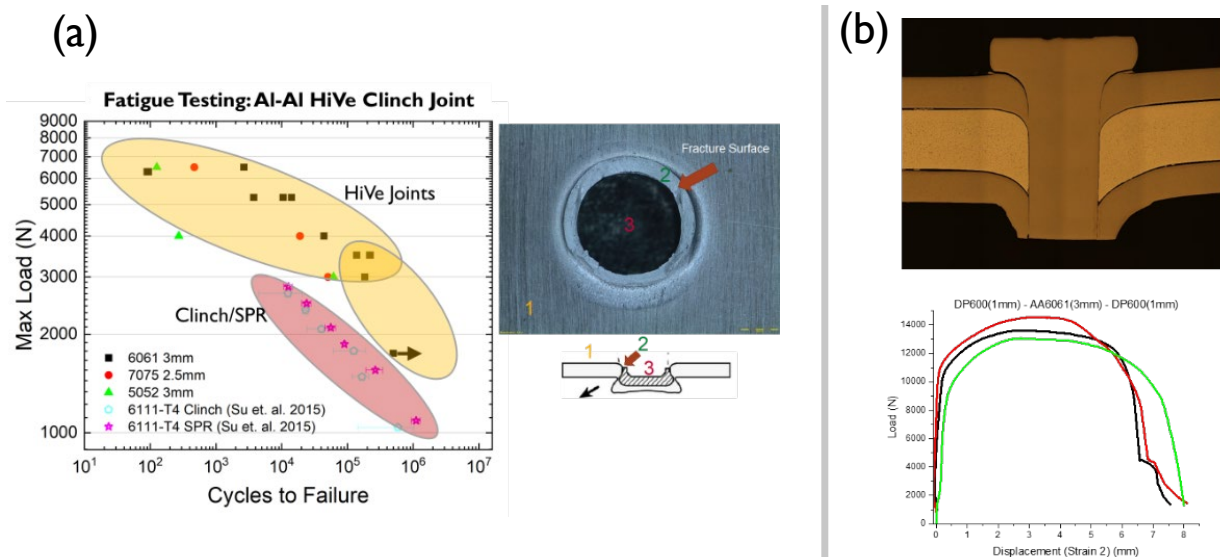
(a) Long-term fatigue testing of Al-Al HiVe joints showing increased performance at higher loadings than commercially available clinch/SPR. Typical fracture surfaces of Al-Al joints indicating common neck failure mode. (b) 3T DP980-AA6061-DP980 stack cross-section with embedded rivet. Subsequent lap-shear performance of 3T HiVe rivet stacks. Source: PNNL.
